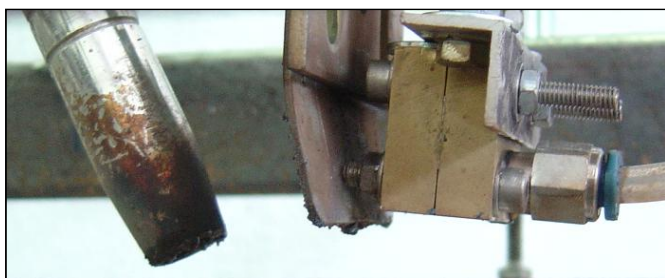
Montage of MIG welding head and micro-jet injector
